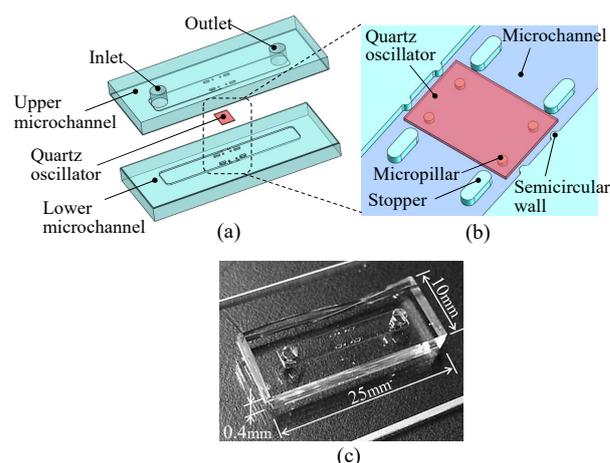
(a) Exploded view of the PDMS RAMNE-Q biosensor chip, (b) Enlarged view, (c) Assembled chip.
